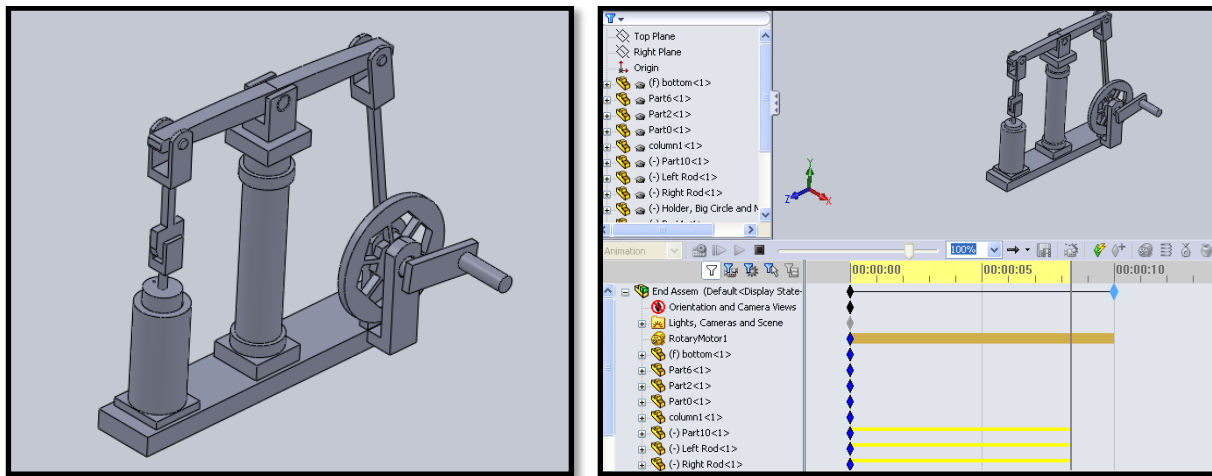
(left) SolidWorks drawing of a mechanical system, (right) Motion study of the mechanical system
